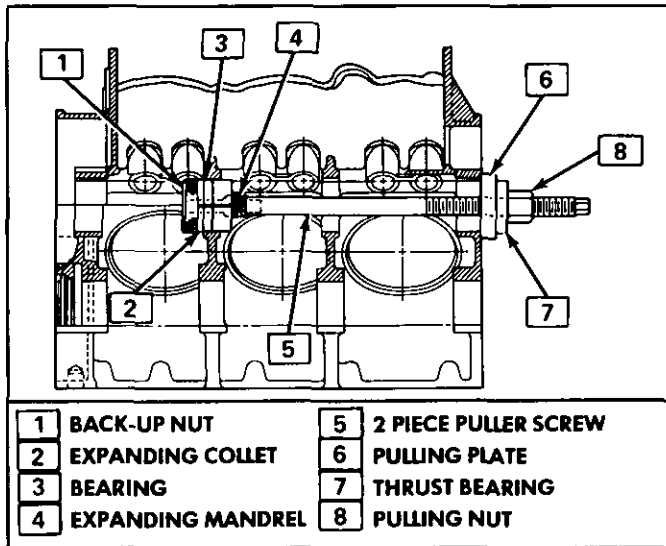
Removing/Installing Camshaft Bearings (Typical)
